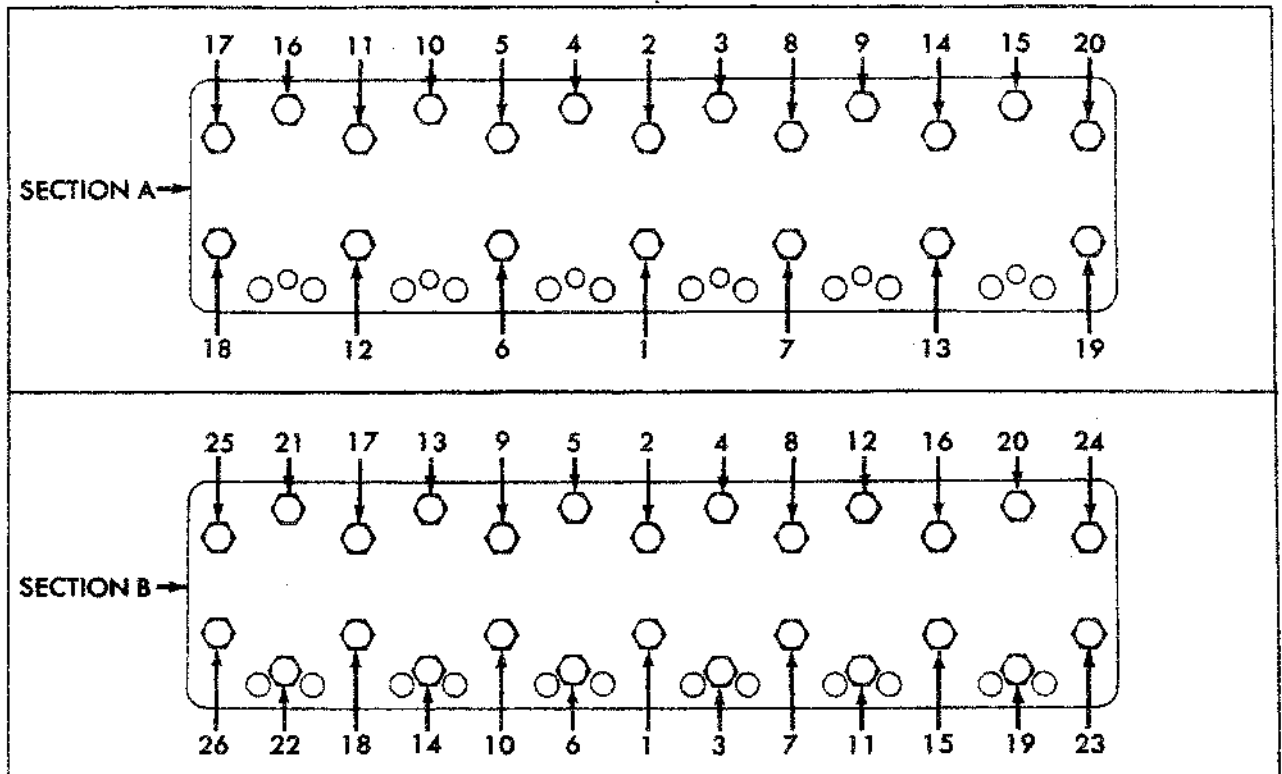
Cylinder Head Capscrew Locations and Torquing Sequence (T-50775)
